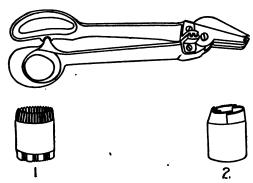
Double Cutting Shears with Pipe Crimper. 1, Crimped with Attachment Fitted to Shears; 2, Old Method.
